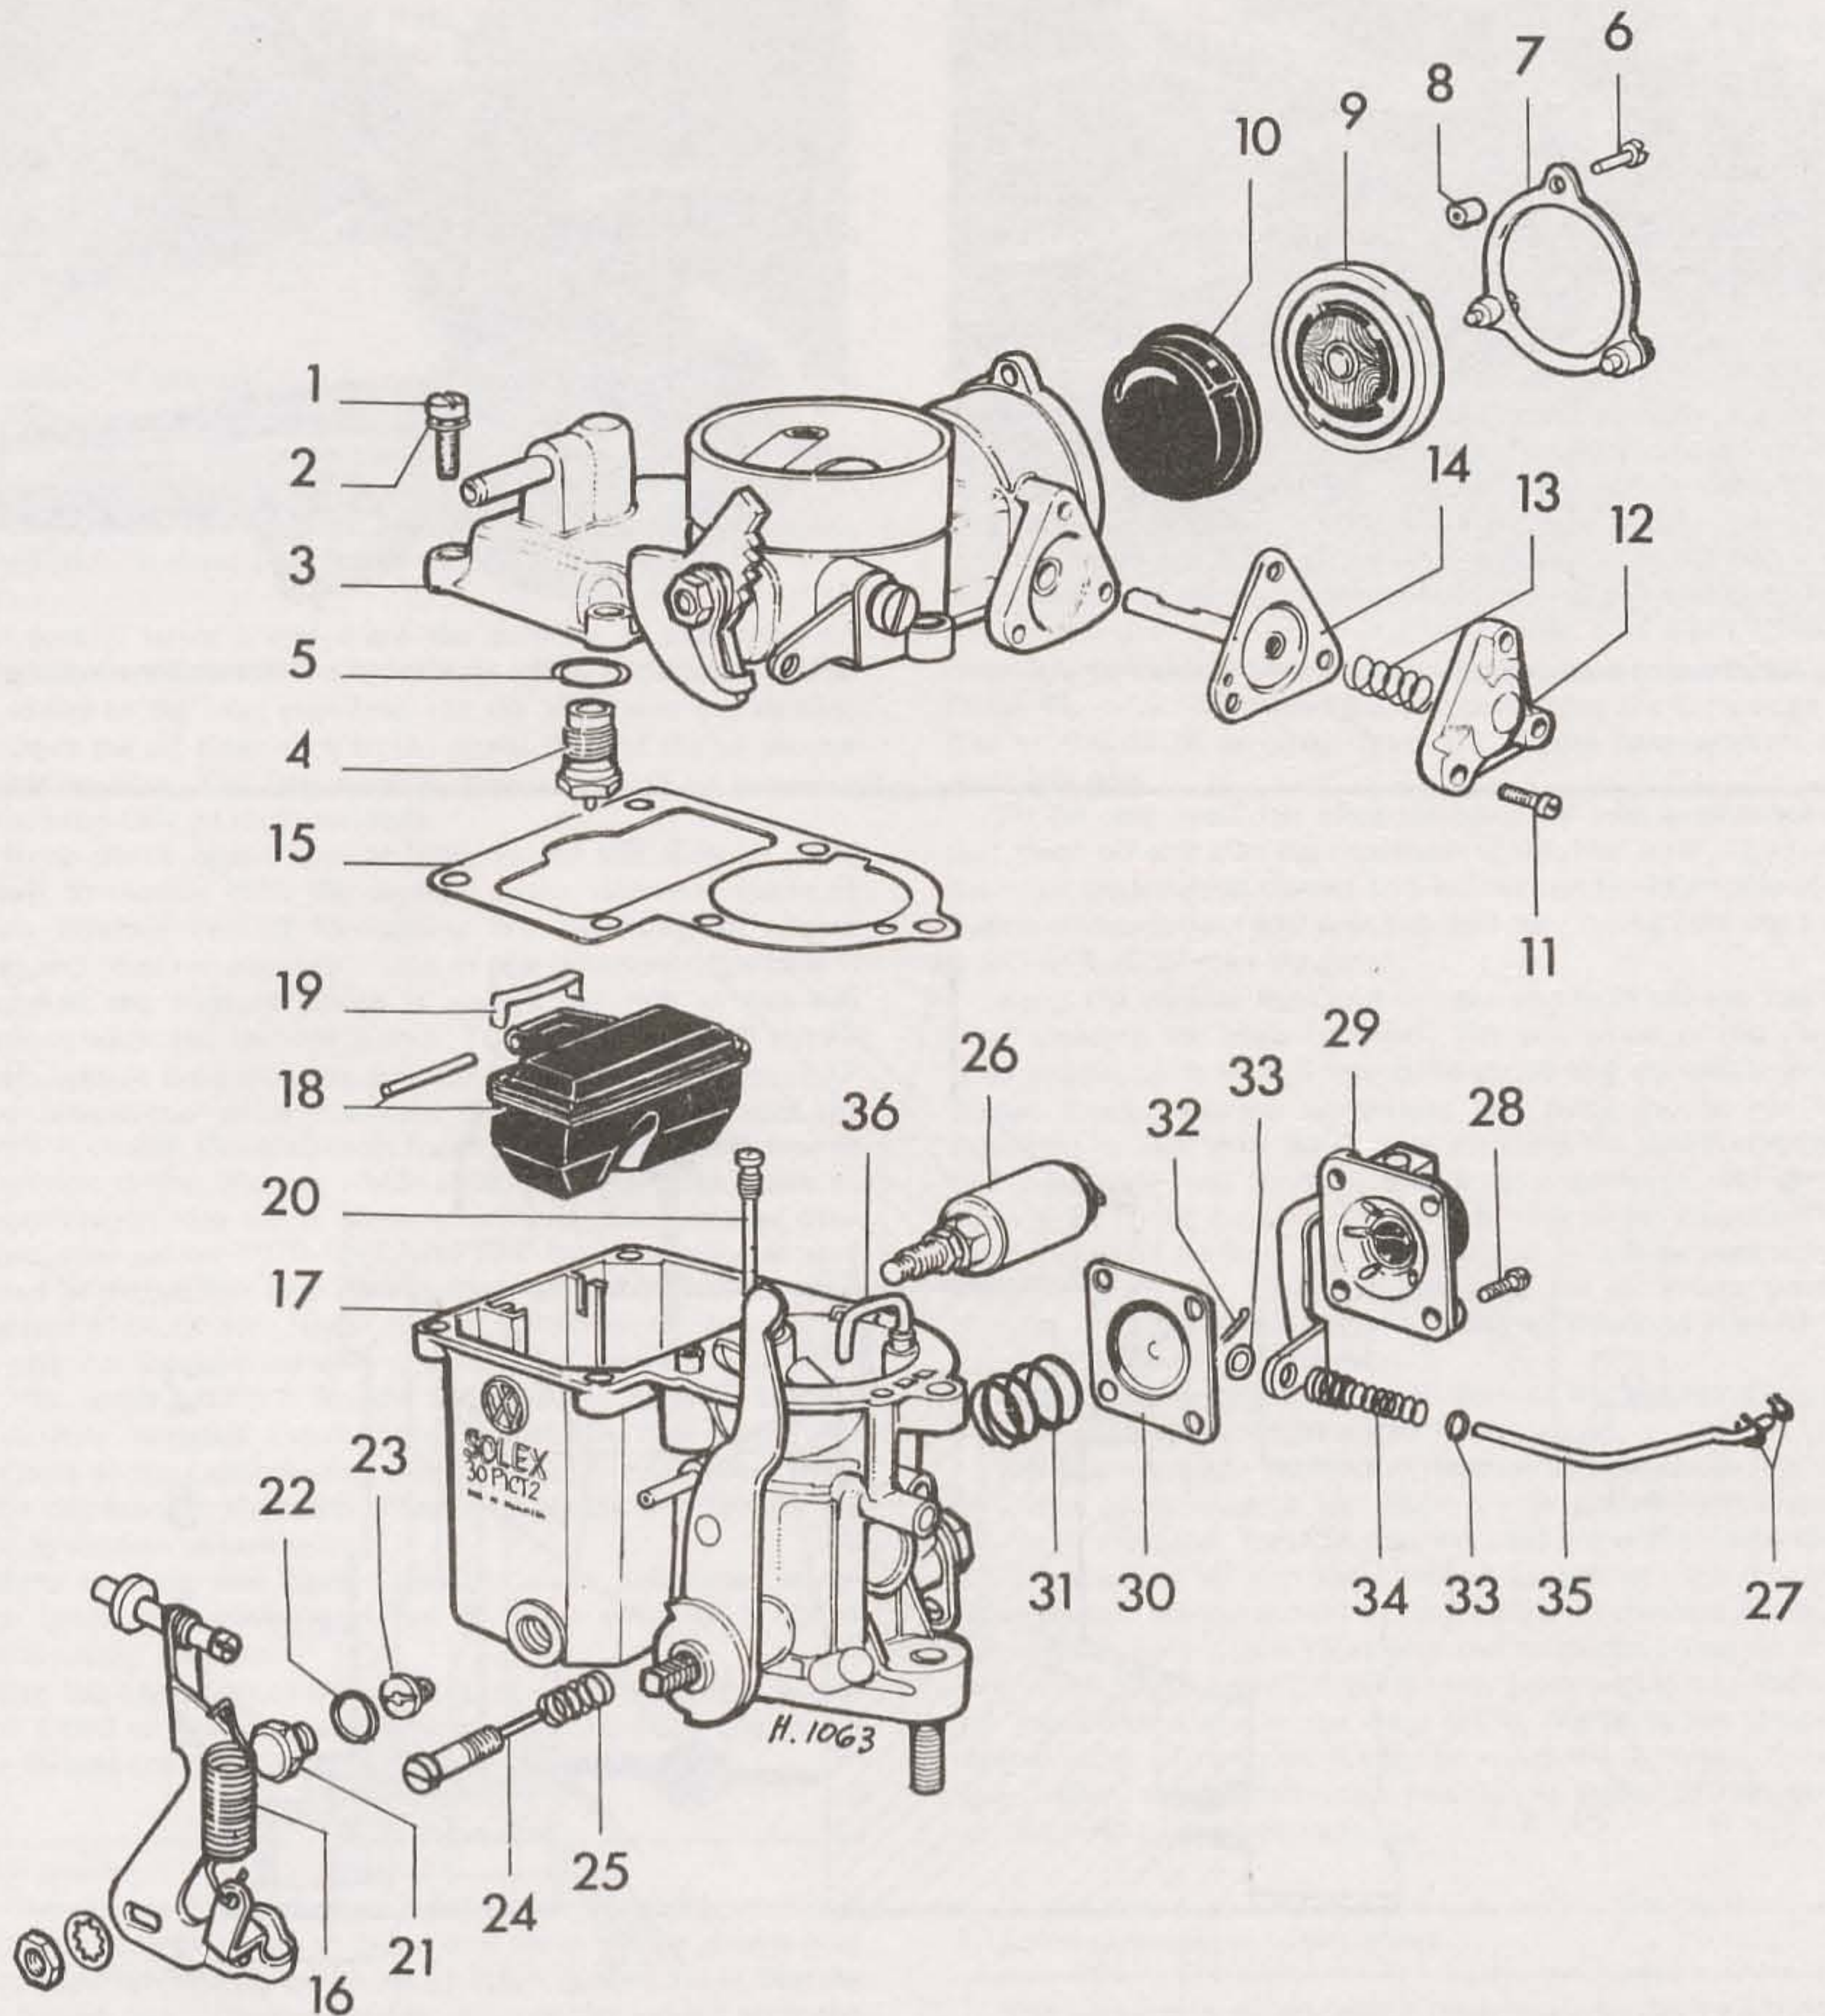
A. CARBURETTOR SOLEX 30 PICT/2
